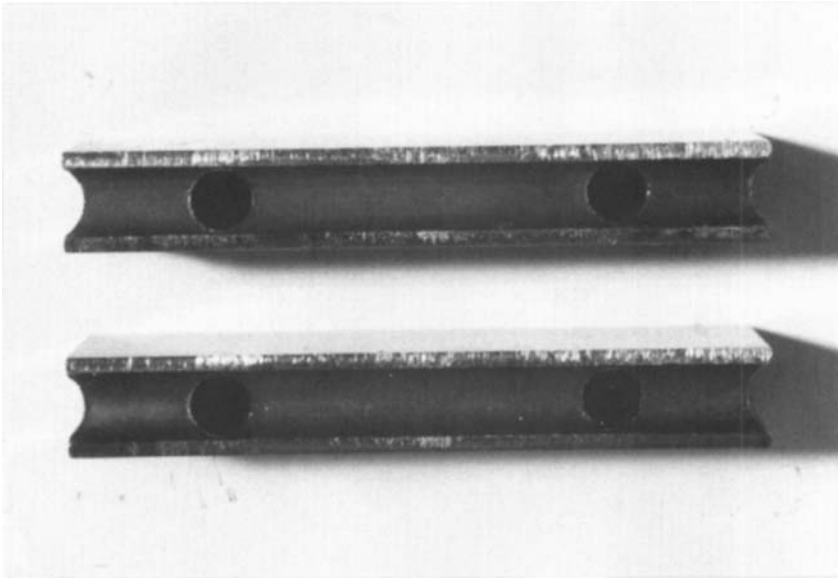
Vane-tip wear due to particle ingress through breather pipe. No air filter was used. (Courtesy of Denison Hydraulics Inc., Marysville, OH.)
